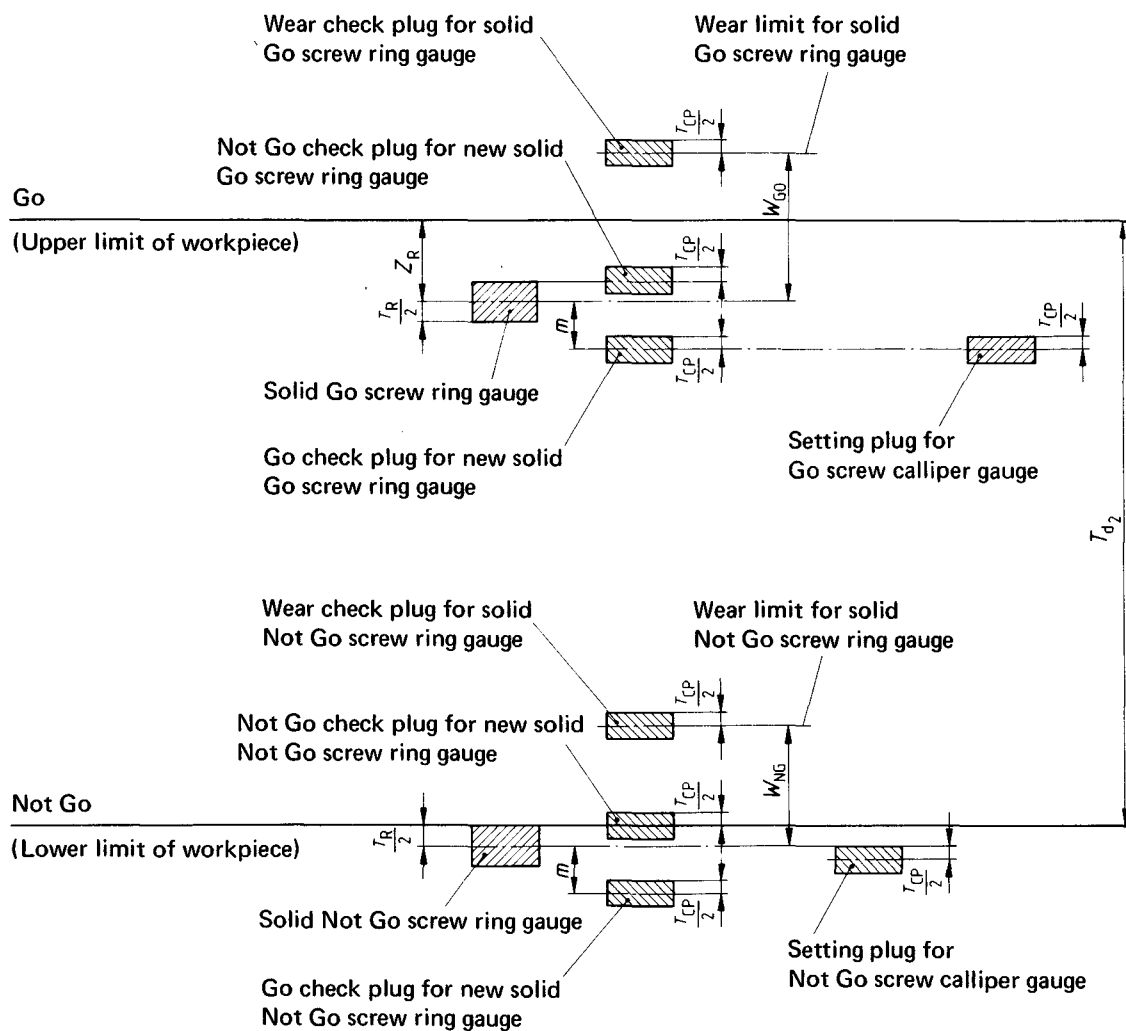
Tolerance zones for the pitch diameter of gauges for checking external threads
